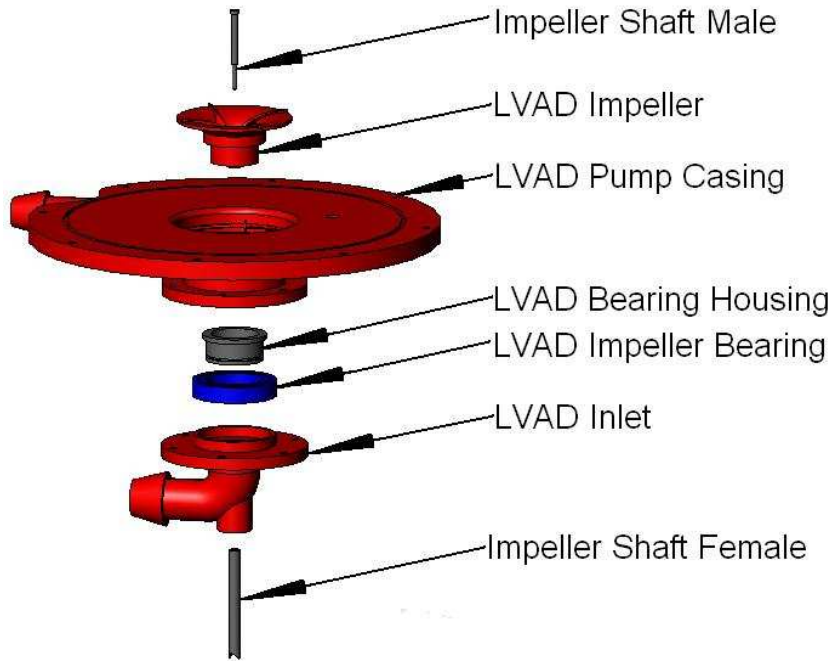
Exploded view of LVAD Components, a sub assembly of the complete device.
